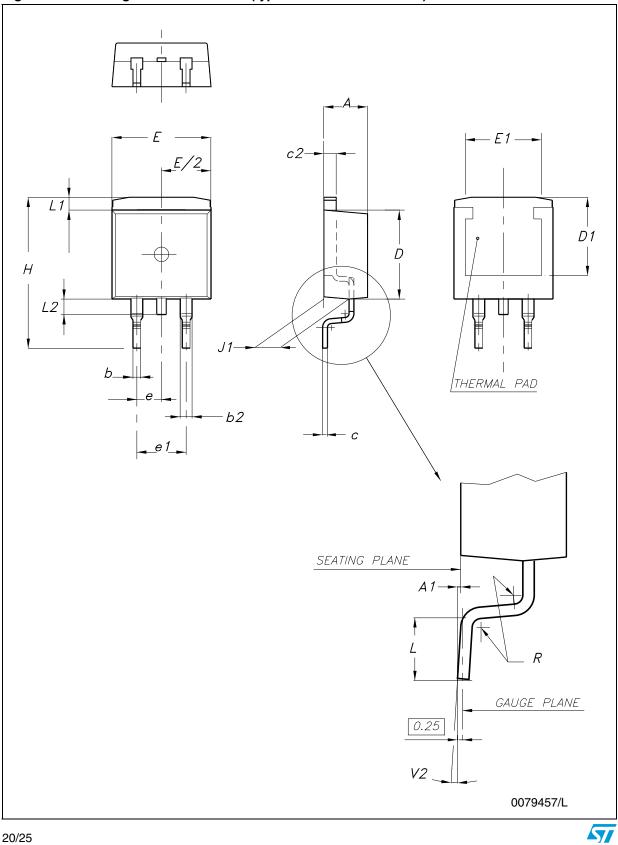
Drawing dimension D²PAK (type WOOSEOK-SUBCON.)
